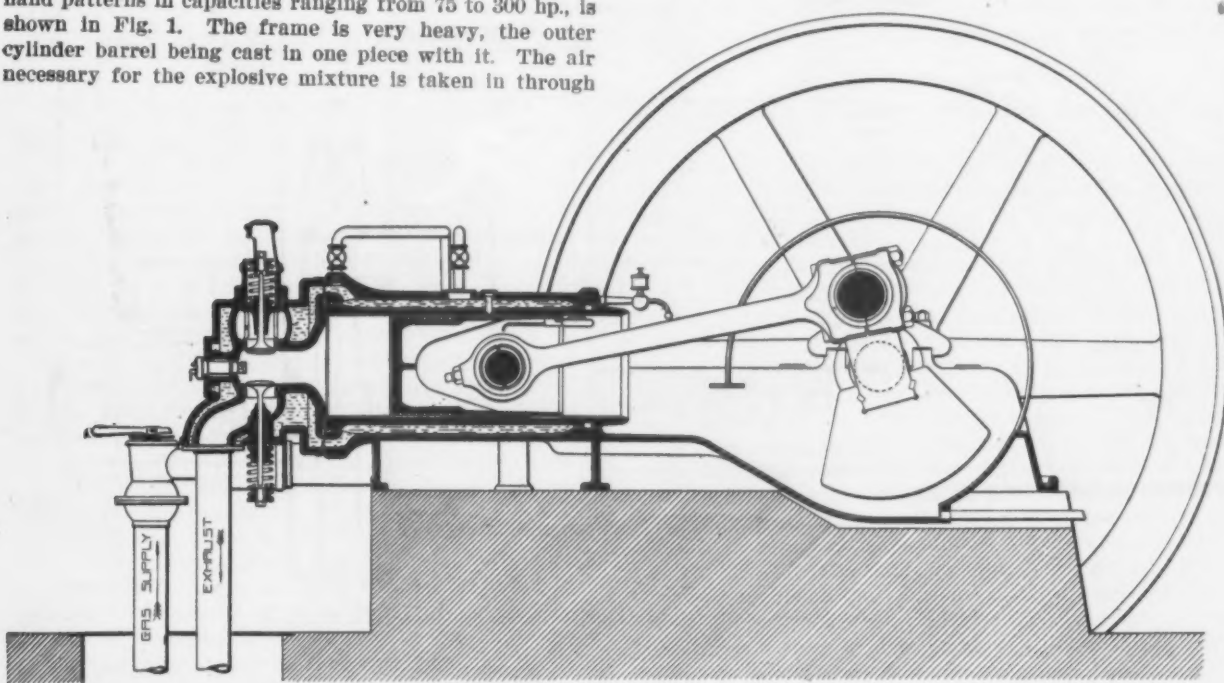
Cross Section of the Munzel Gas Engine, Built by the Minneapolis Steel & Machinery Company, Minneapolis, Minn.
